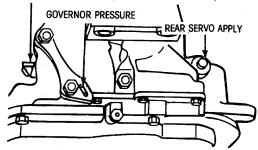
Pressure Test Locations (Rear End of Transmission)
